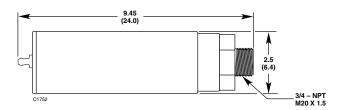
Stainless Steel PointWatch Unit Dimensions in Inches (cm)
